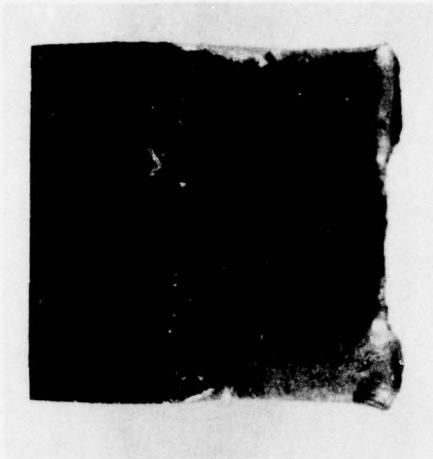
Charpy specimen D1-2 fracture surface,
